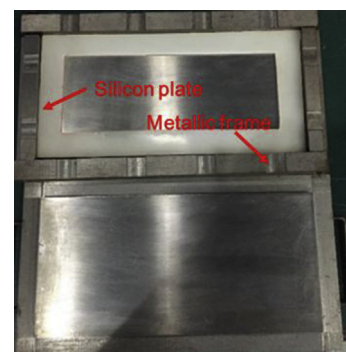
Metallic mold for manufacturing the adhesive sheet.
